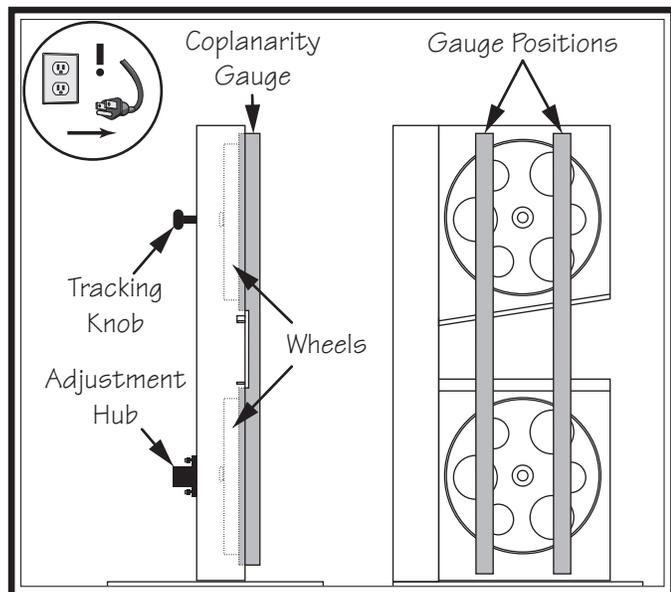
Illustration of using coplanarity gauge to check wheel alignment.
